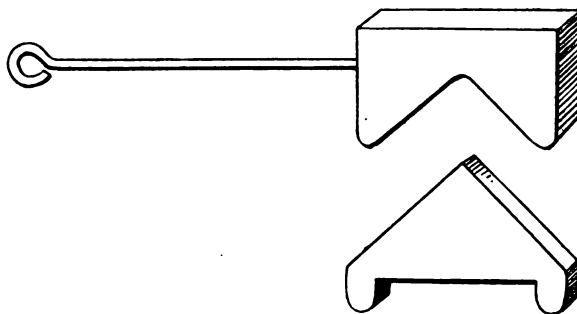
TOOL FOR BENDING RIGHT ANGLES.
